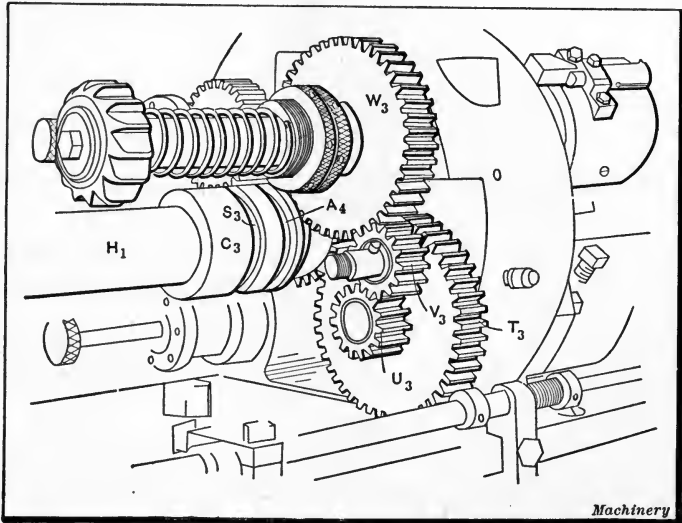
Gears arranged to Drive the Right-hand Threading Mechanism at its Slowest Speed
